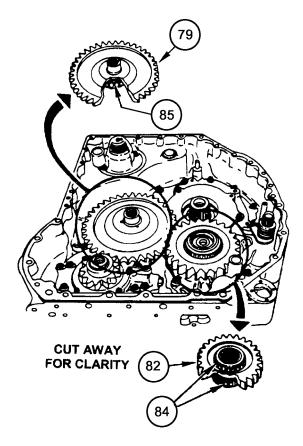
Range Output Gears, Steer Shaft Drive Gear and Replacement Bearings.
